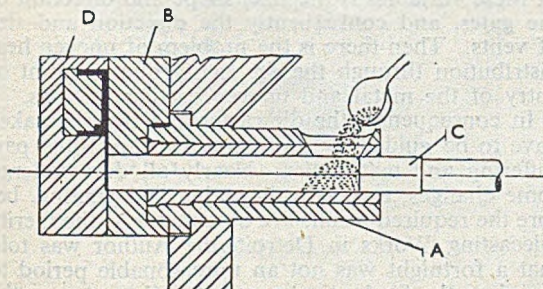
Cold-chamber Die-casting Machine with Horizontal Plunger.
